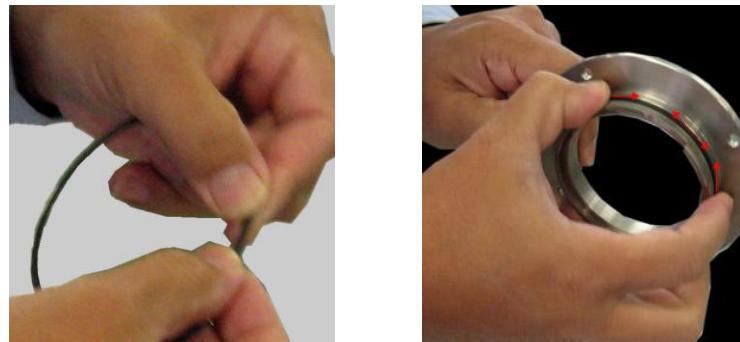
Attachment of O ring to RV disk hold ring
